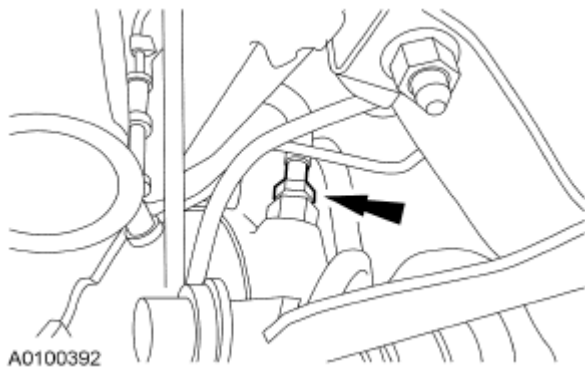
Locating Rear Transmission Fluid Cooler Tube
